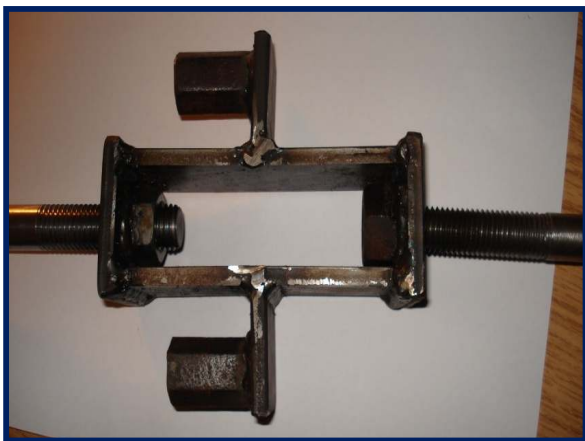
Prototype Assembly – insertion of Top link in Turnbuckle - B.Hand 2014
